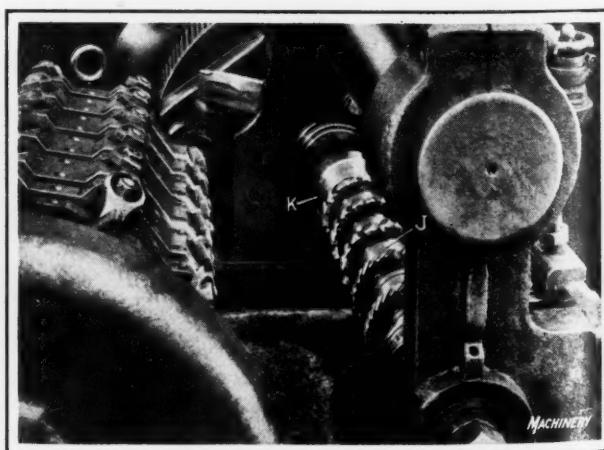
Work-drum withdrawn from the Cutter-arbor to give a Clear View of the Cutters
